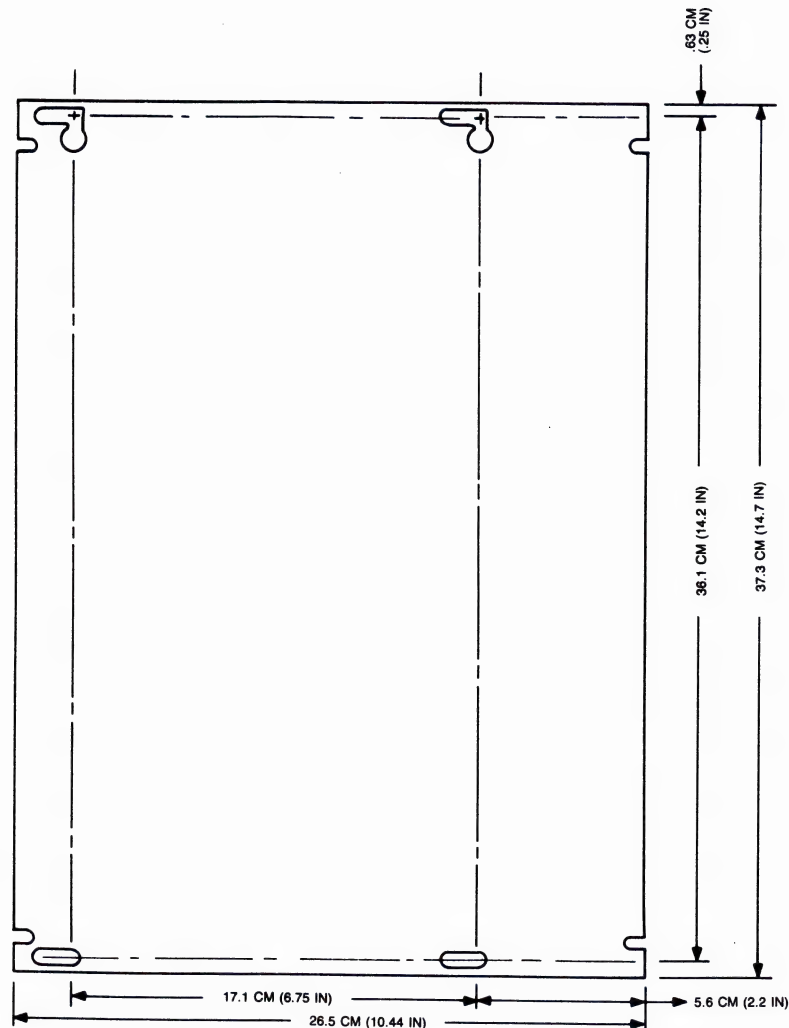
Mounting Dimensions for Model 500-5892 Base Assembly
